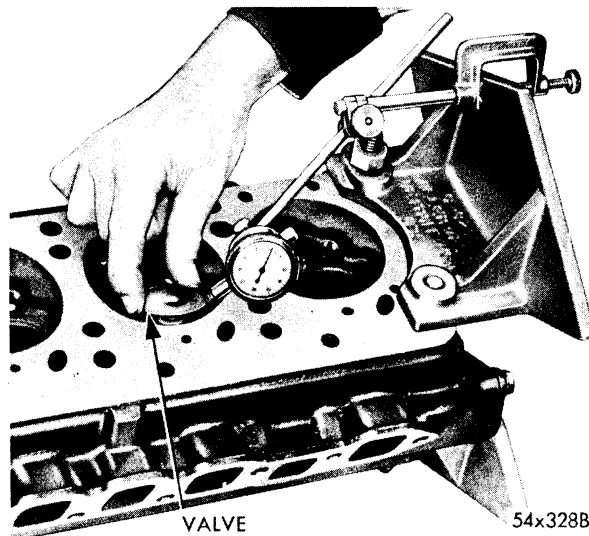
Checking Valve Guide Clearance (SpitFire) (Typical of FirePower)
